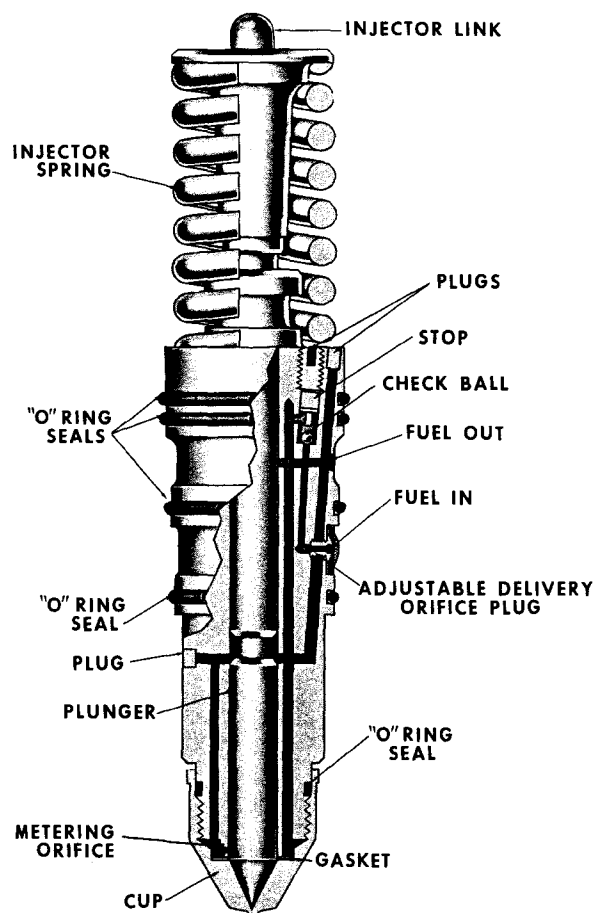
Cross section, cylindrical PT (type B) injector
